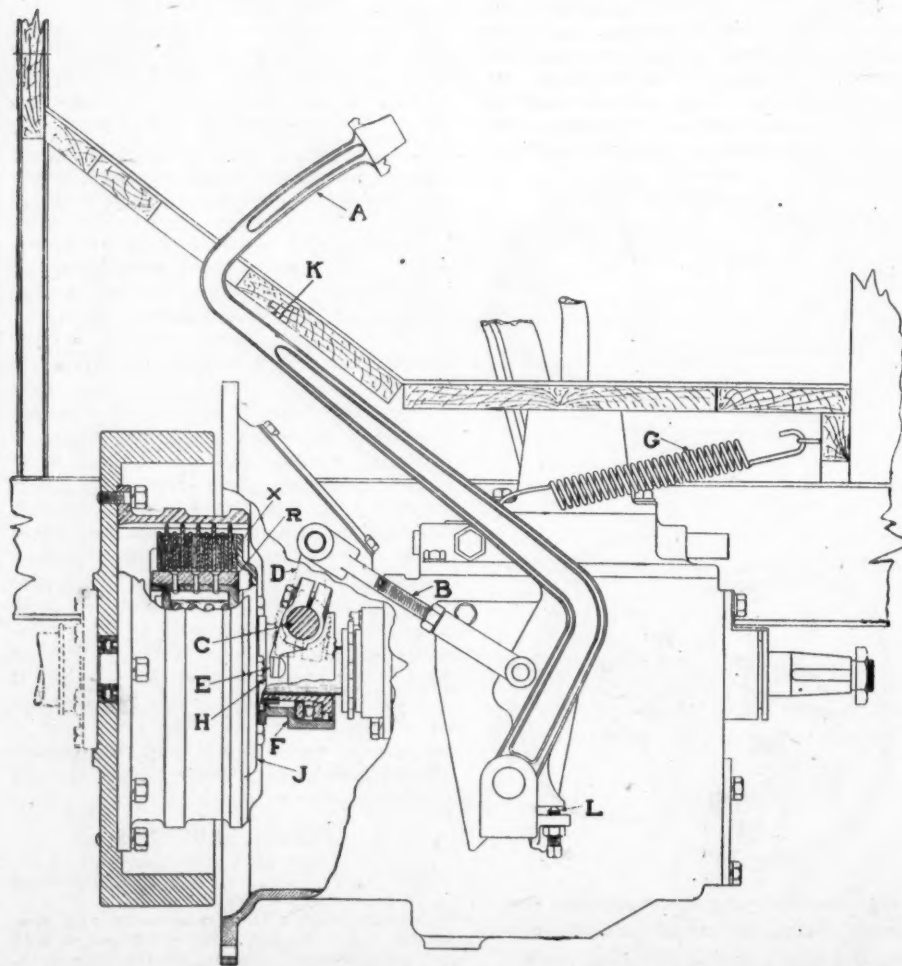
Sectional view of the G. M. C. 1-ton clutch assembly
